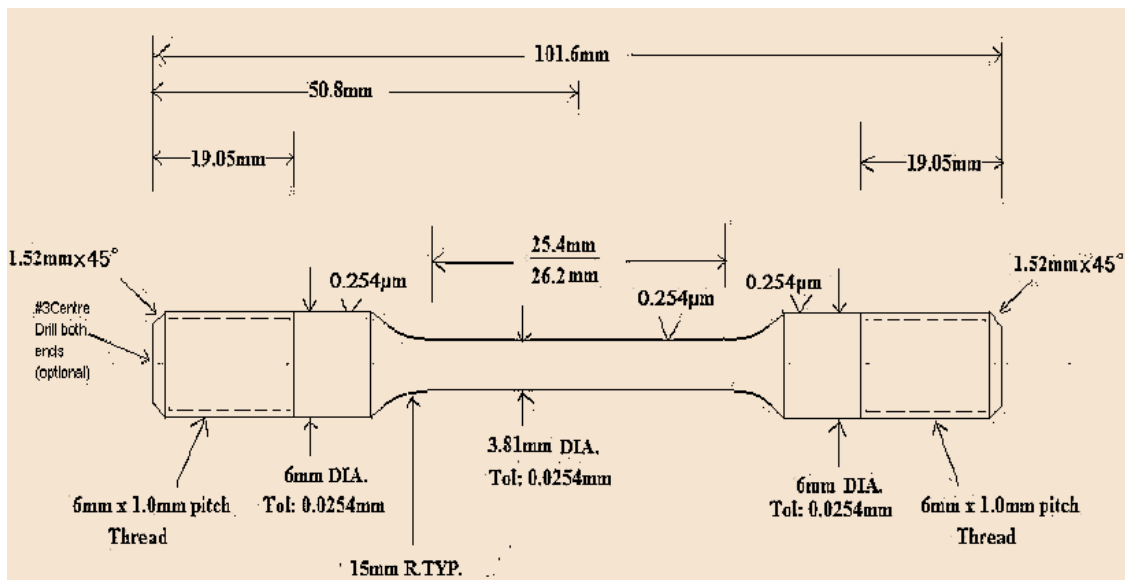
Dimensions of the specimen used for SSRT tests [19].
